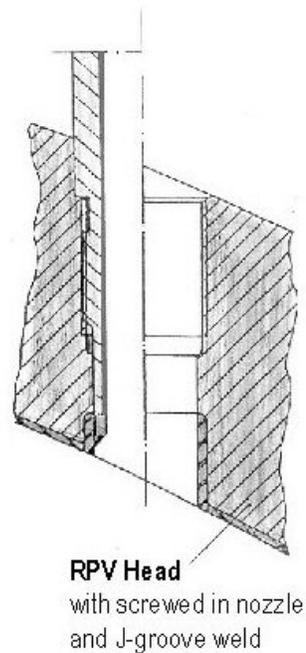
Section of RPV head with screwed-in and seal welded nozzle end
